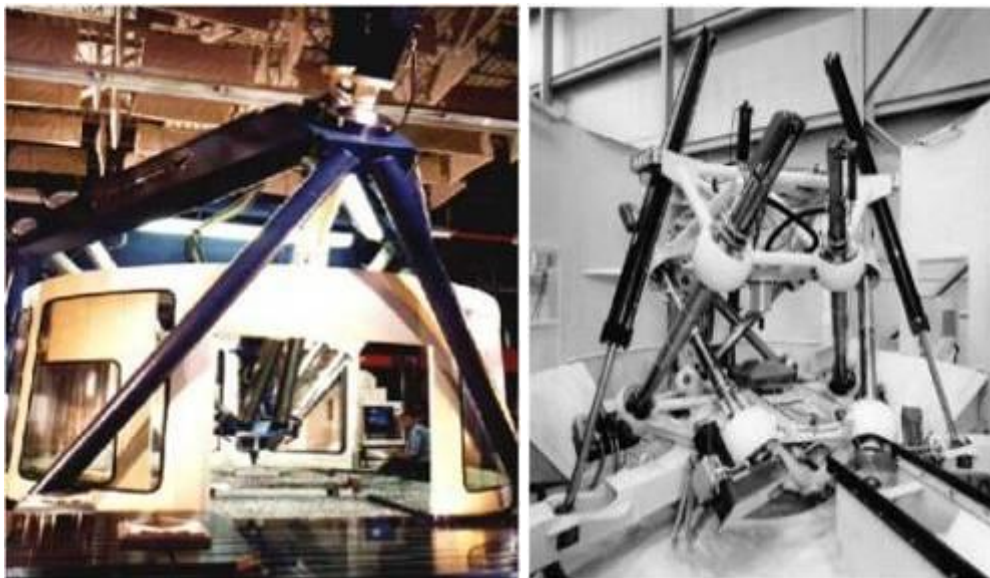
The Ingersoll Octahedral Hexapod machining center
